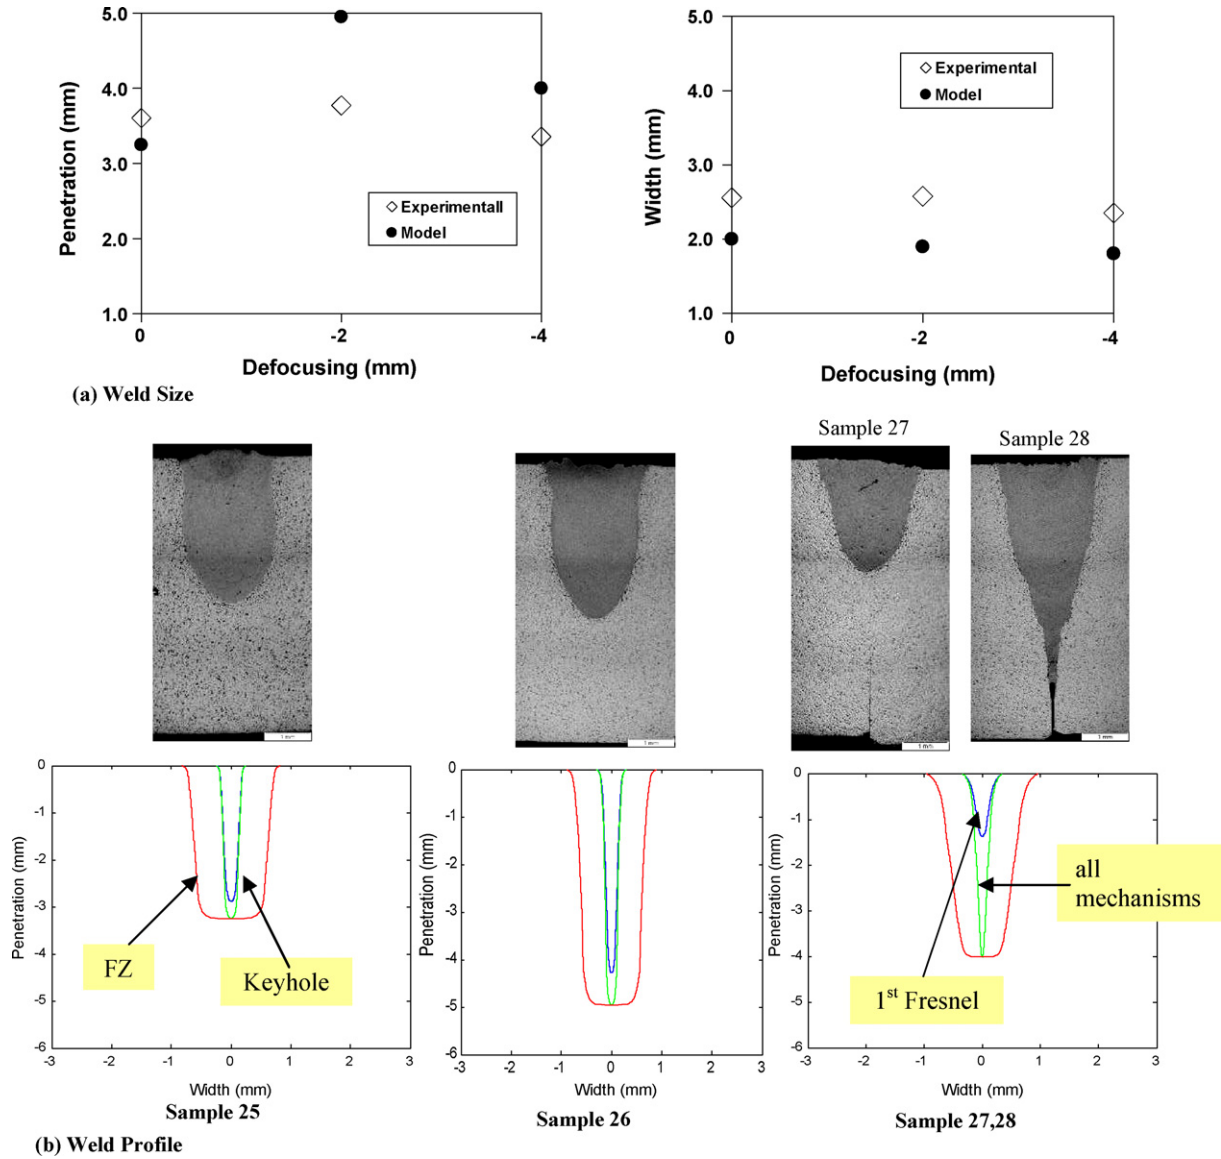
Comparison between the experimental results and the model for 6 mm bead-on-plate laser welding (a) weld size (b) weld profile.
